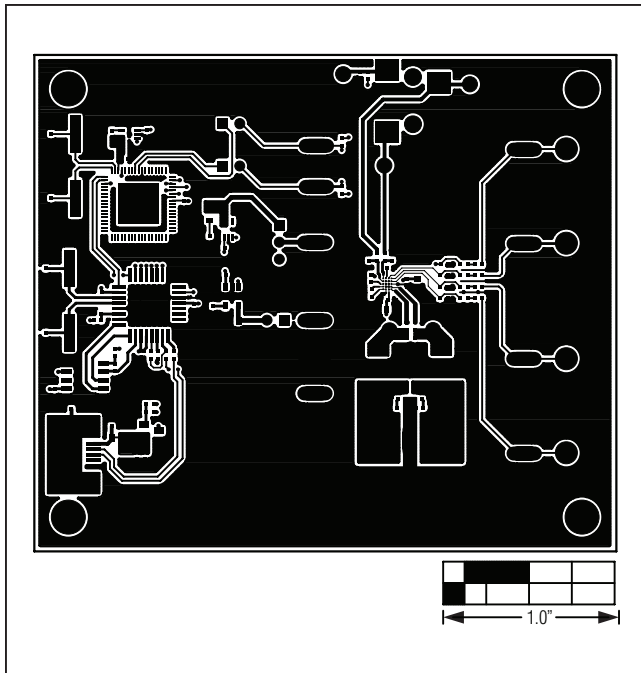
MAX97003 EV Kit PC Board Layout—Component Side
